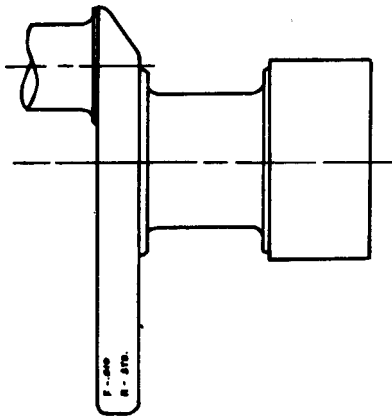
(N101140) Oversize thrust bearing mark on crankshaft
